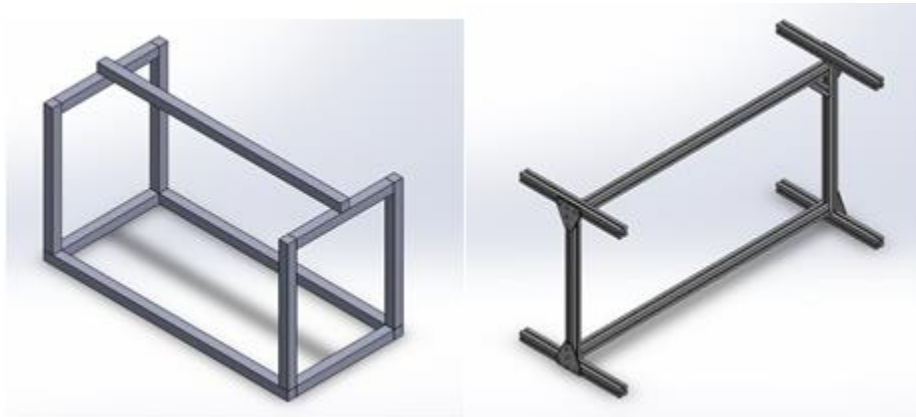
a) Jig made from straight bar stock aluminum b) Jig made from aluminum 8020 extrusions
